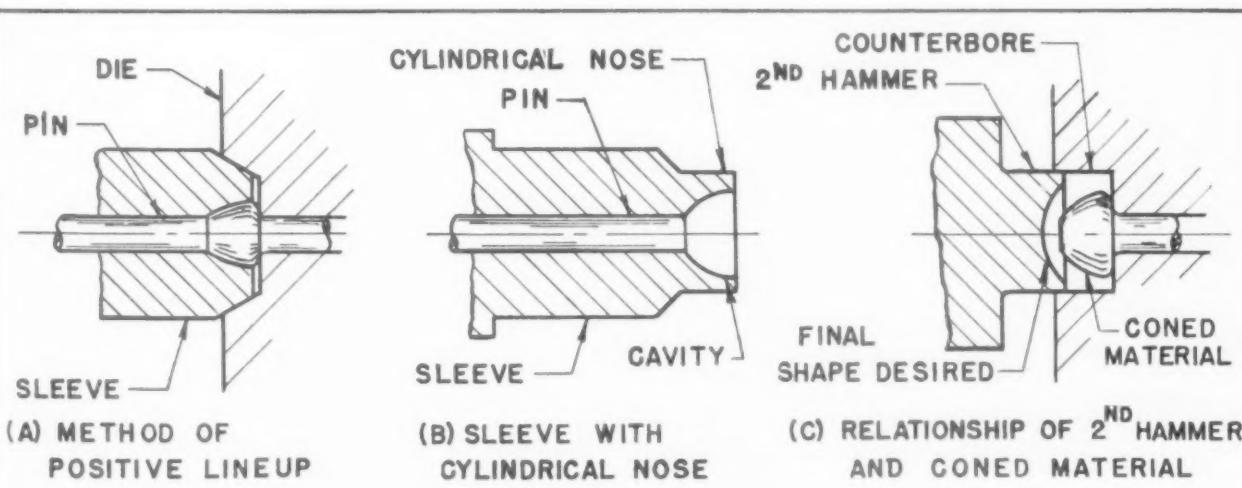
AUXILIARY METHODS OF ASSURING TOOL LINEUP
